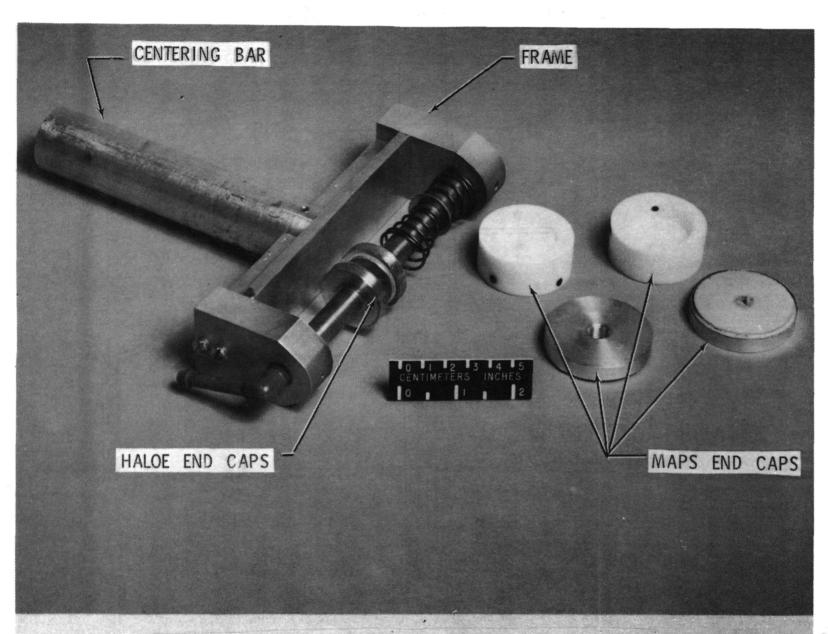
FILL STEM TO CELL BODY ASSEMBLY FIXTURE
